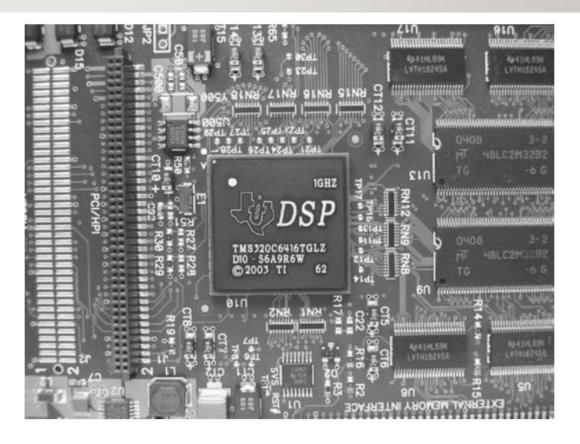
Test image for the design of a machine vision system to read the label of the main integrated circuit on a printed circuit board.
